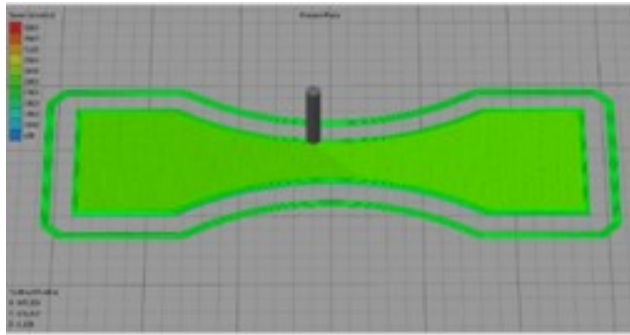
Tool path for building AM fatigue coupon using Simplify 3D.
